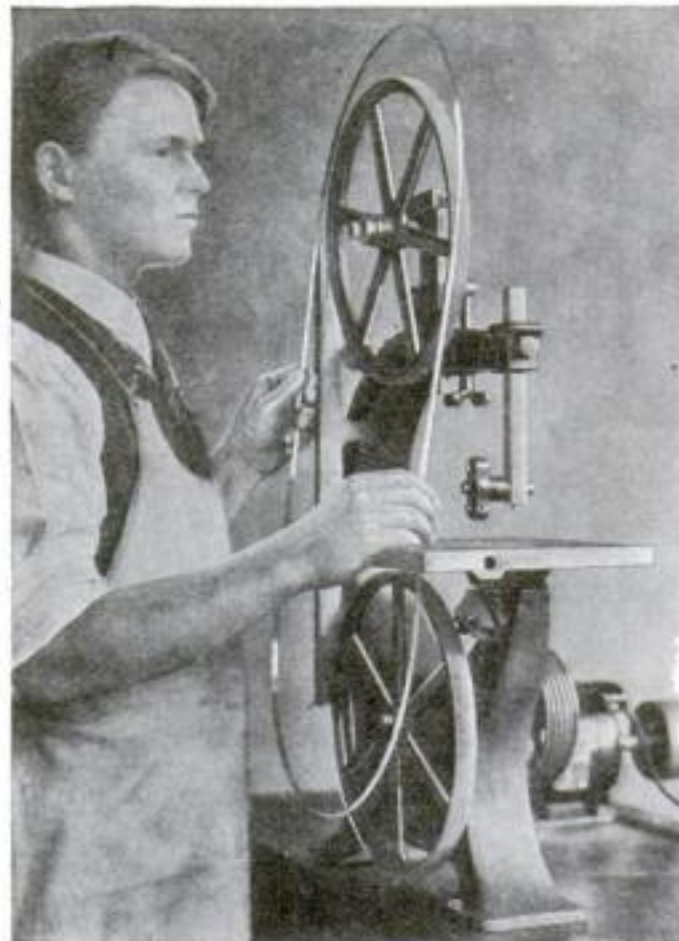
The upper wheel is lowered enough to allow the blade to be slipped on easily.
